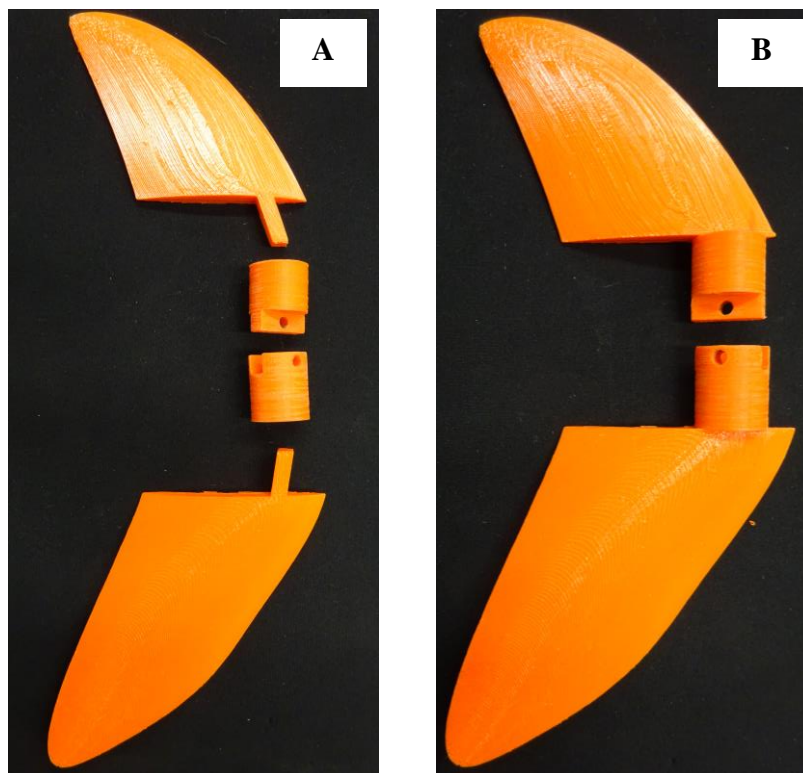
Photographs of blade assembly process showing the blades A) before and B) after bonding the interlocking hubs to the blade root.
